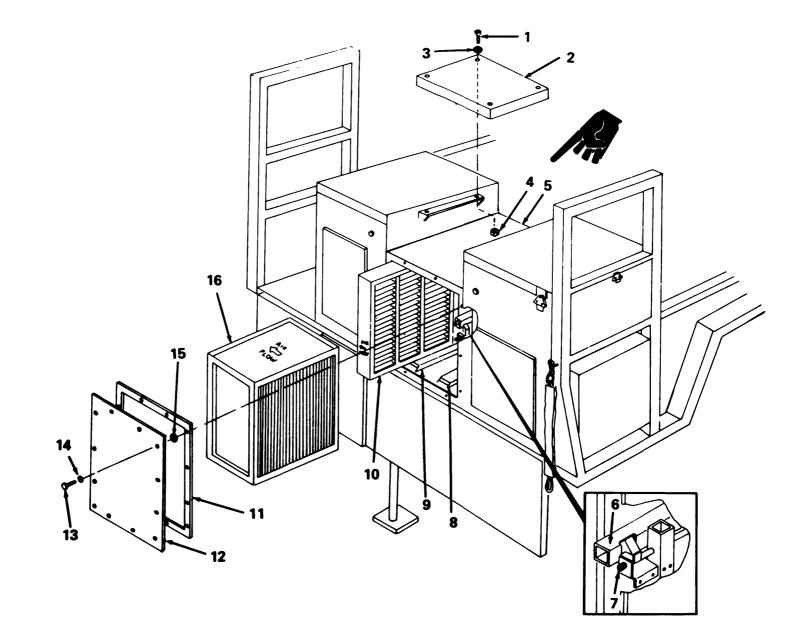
Gas and particulate filters installation, and shelter side support, exploded view.
